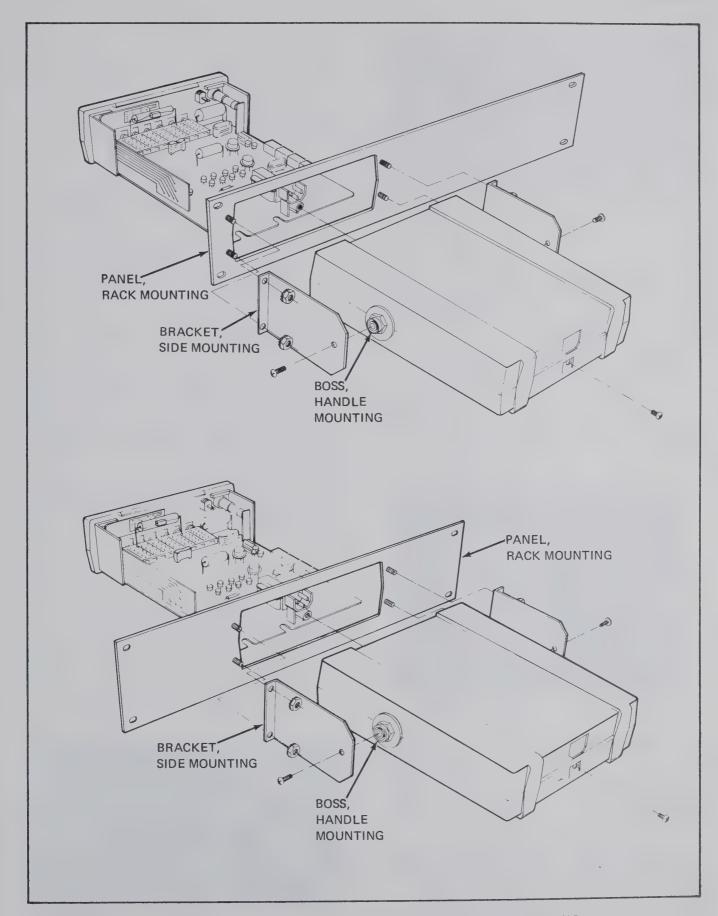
RACK MOUNTING KITS, OFFSET AND CENTER MOUNTING
